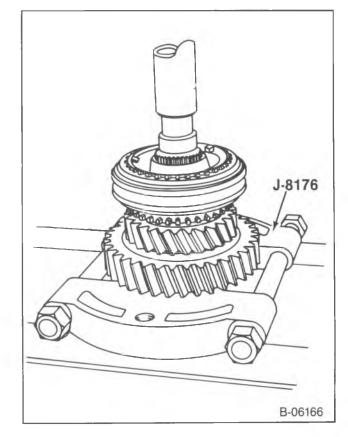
Removing the Mainshaft from the 2nd and 3rd Speed Gears
